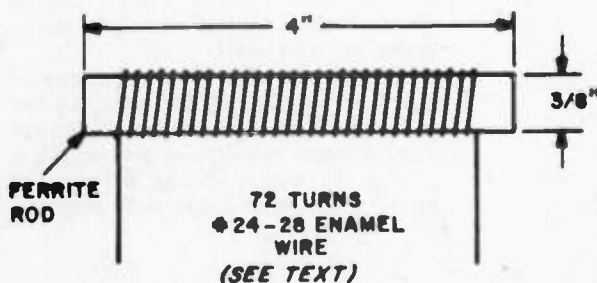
Wind 72 turns of number 24 or 26 wire upon a G inch ferrite iron core. Cut the rod to 4 inches in length.
